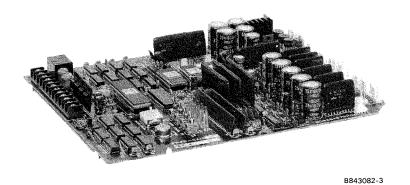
Outlook of Printed Circuit Board FRF2-CA12, 32, 36 & -CB12, 32, 36
